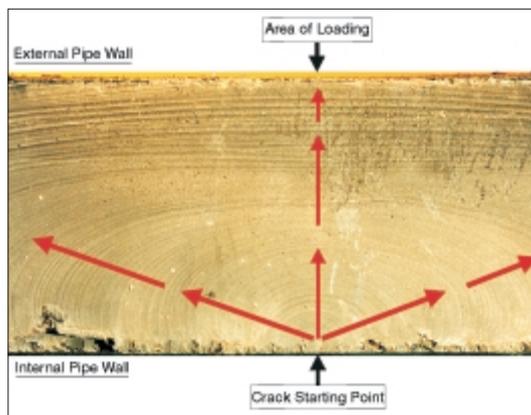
Fracture surface in the wall of an externally loaded polyethylene pipe
